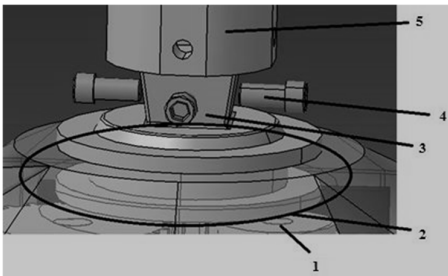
The connection between the prosthetic cup and the terminal device: 1- Housing, 2- Clamping channel, 3- Fastener, 4- Screw, 5- Connecting pole.
